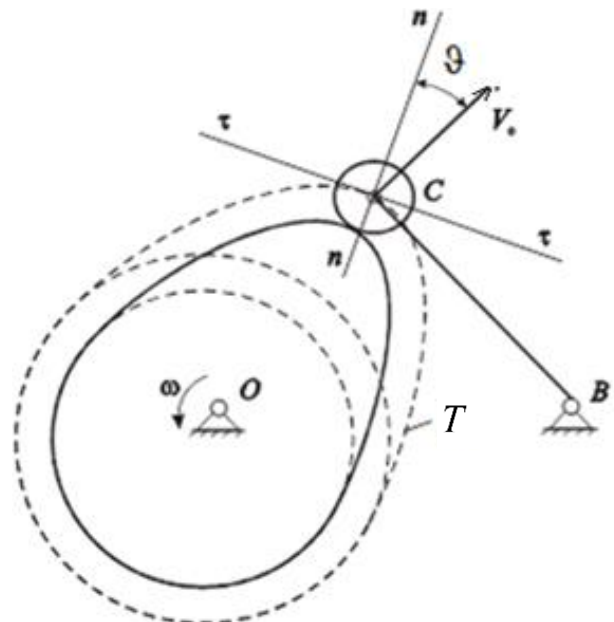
Pressure angle in the cam mechanism with the roller on the rocker arm
